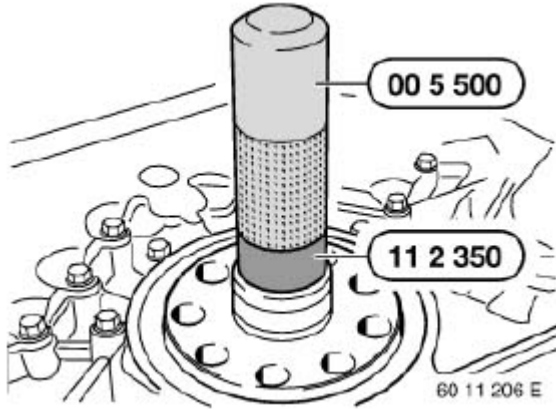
Removing Grooved Ball Bearing With Special Tool (11 2 340)
